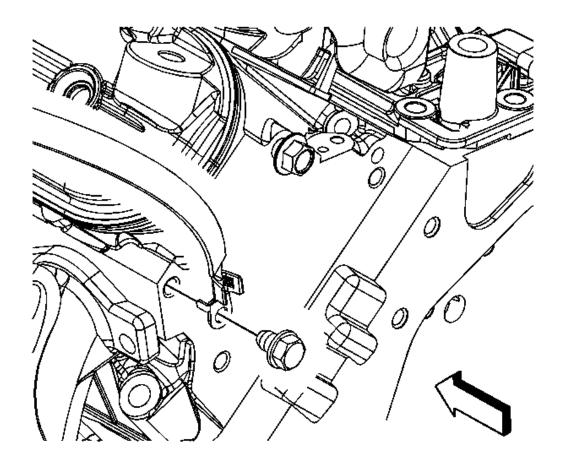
View Of Engine Ground Strap & Bolt Courtesy of GENERAL MOTORS CORP.
